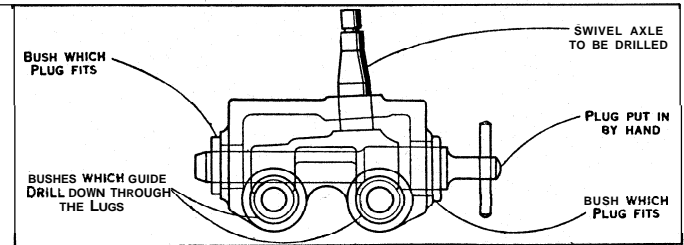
DRILLING JIG WHICH ACCURATELY LOCATES AND HOLDS A SWIVEL AXLE
